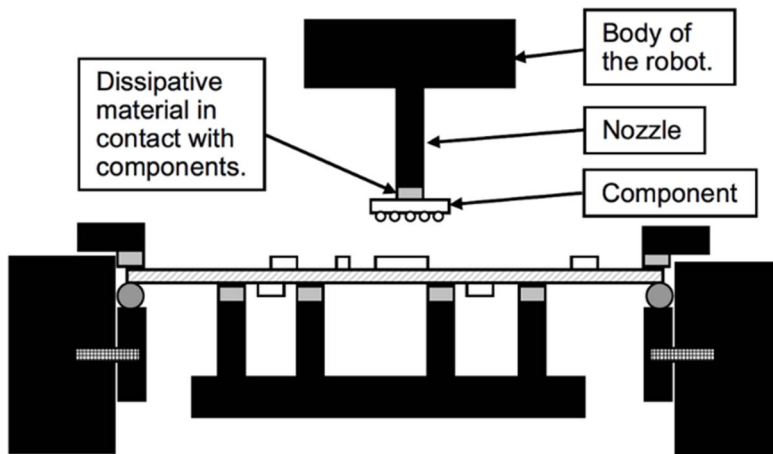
An ESD safe component assembly station with a PCB clamp, center support, and placement head.
